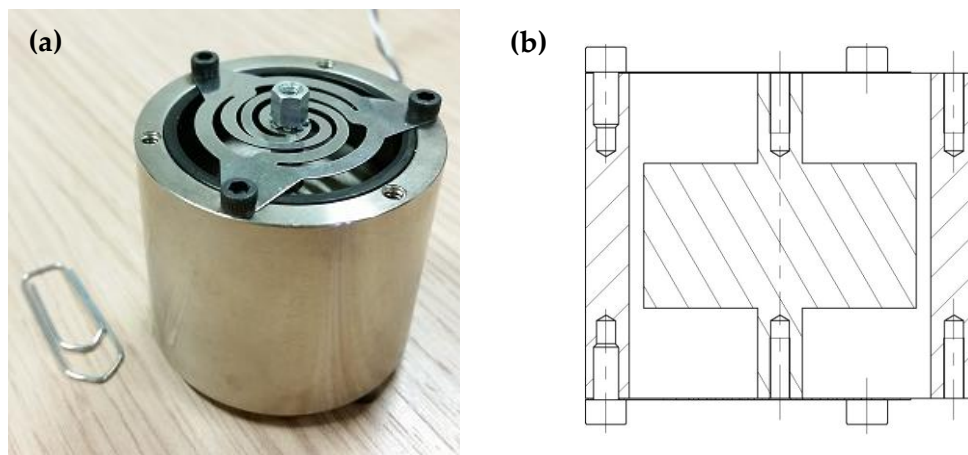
Coil magnet transducer. Picture (a) and schematic section view (b).
